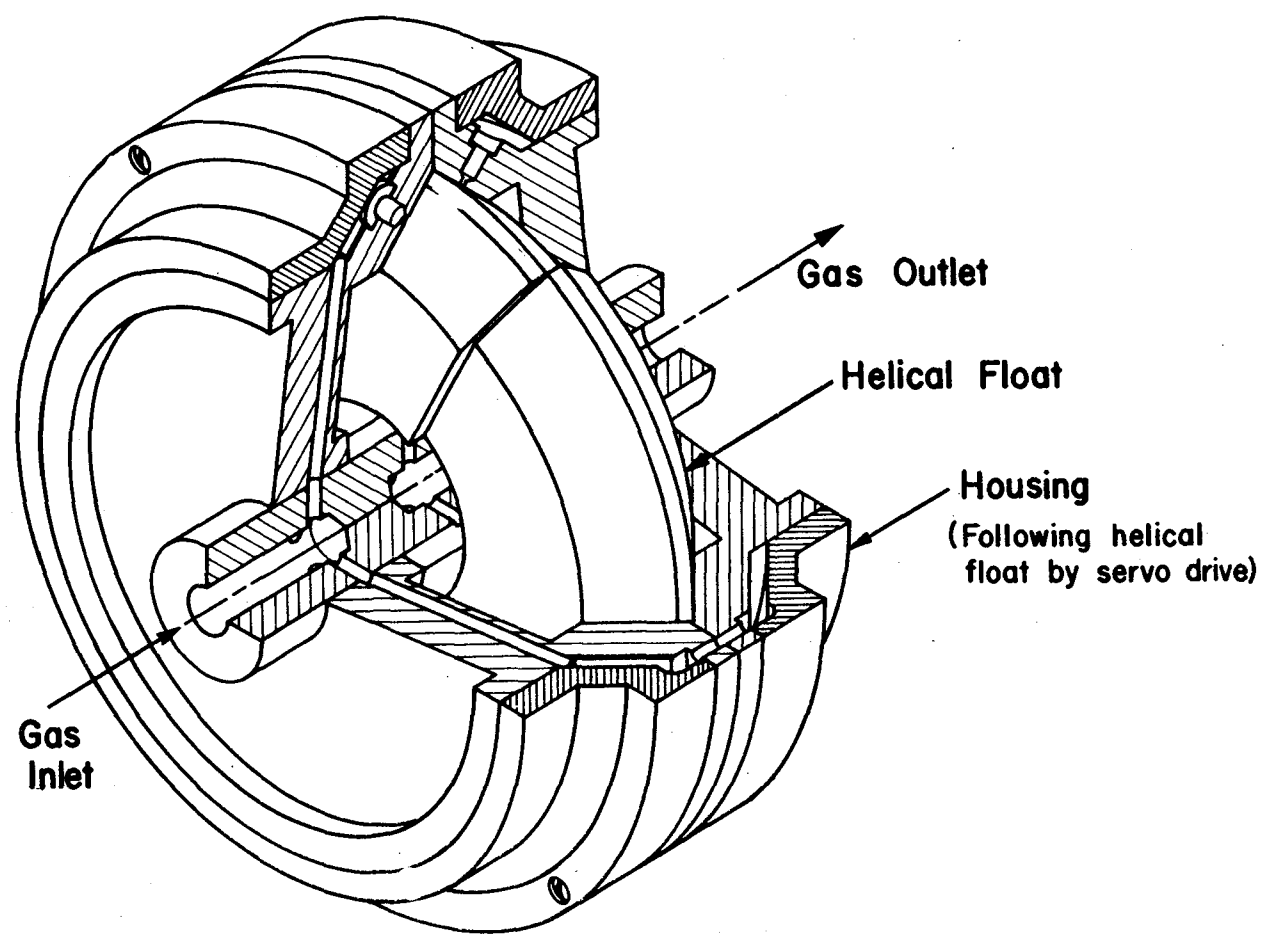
Air bearing accelerometer (1 turn helix).
